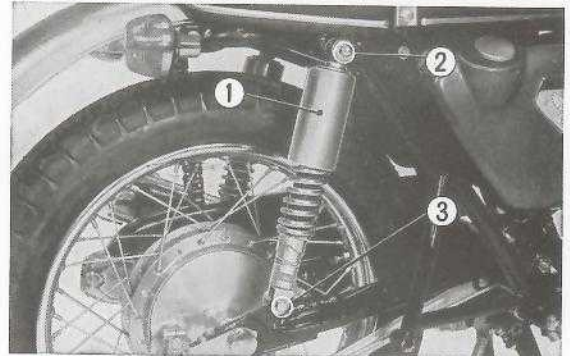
① Rear cushion ② Cap nut ③ Setting bolt
